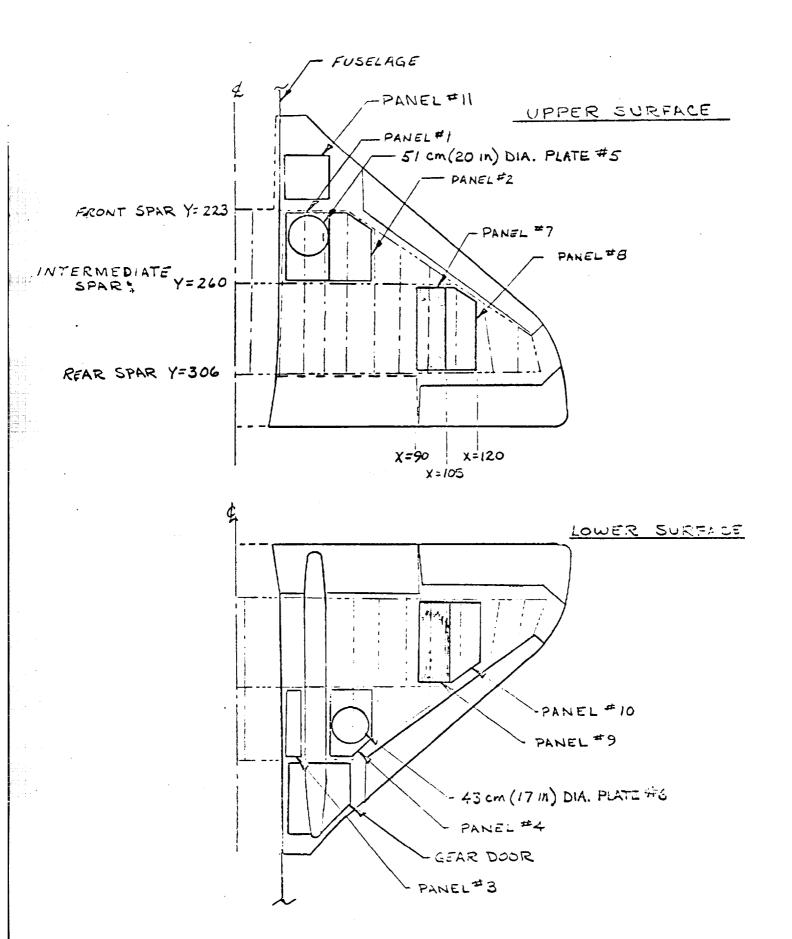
HOLE CONFIGURATION #7. PANELS 7&9 REMOVED
